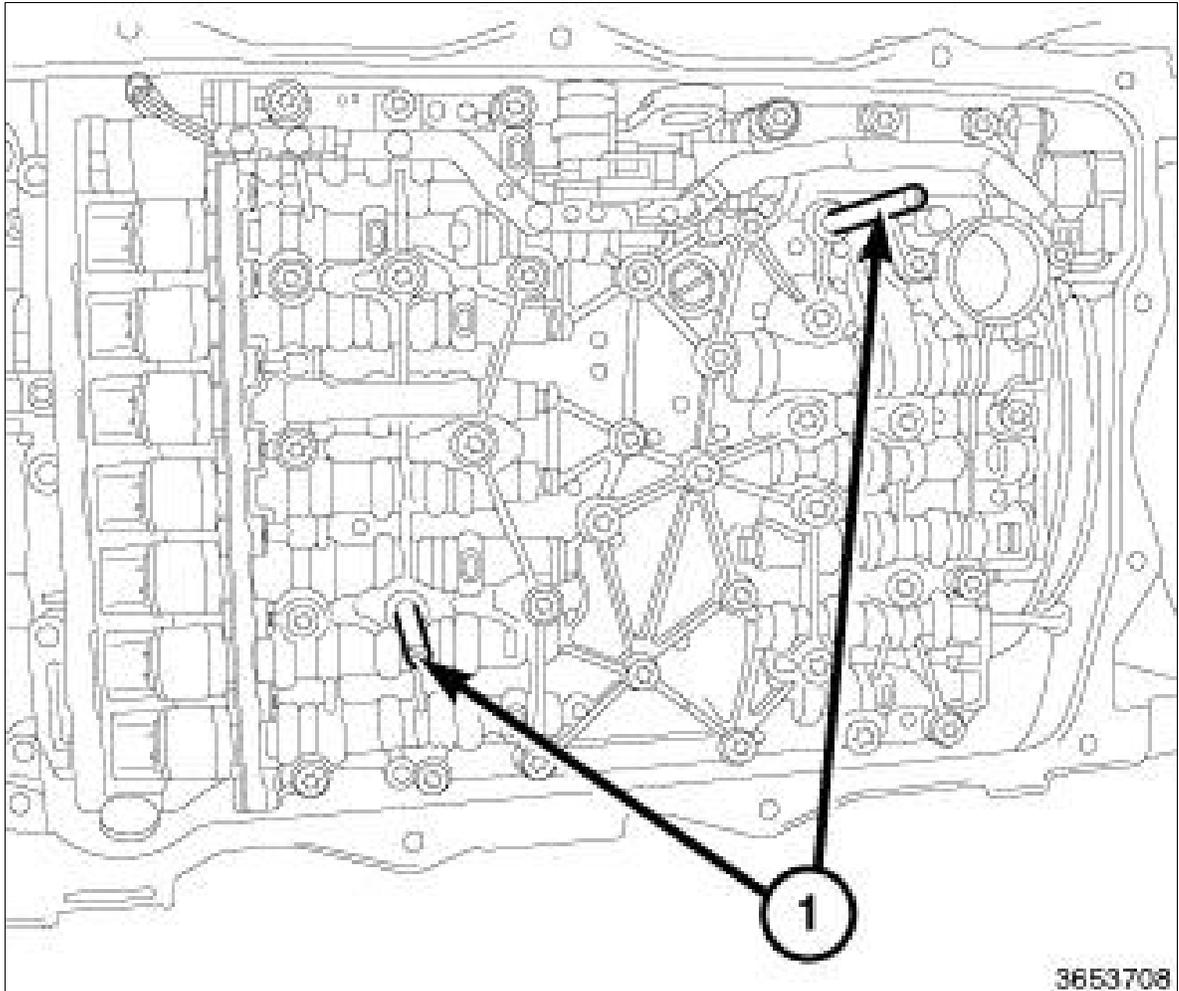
Fluid Port, Two O-Rings, Compression Seal
